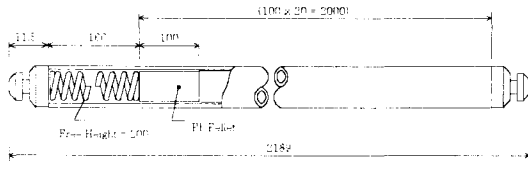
Dimensions of the dummy fuel rod (Unit: mm)
